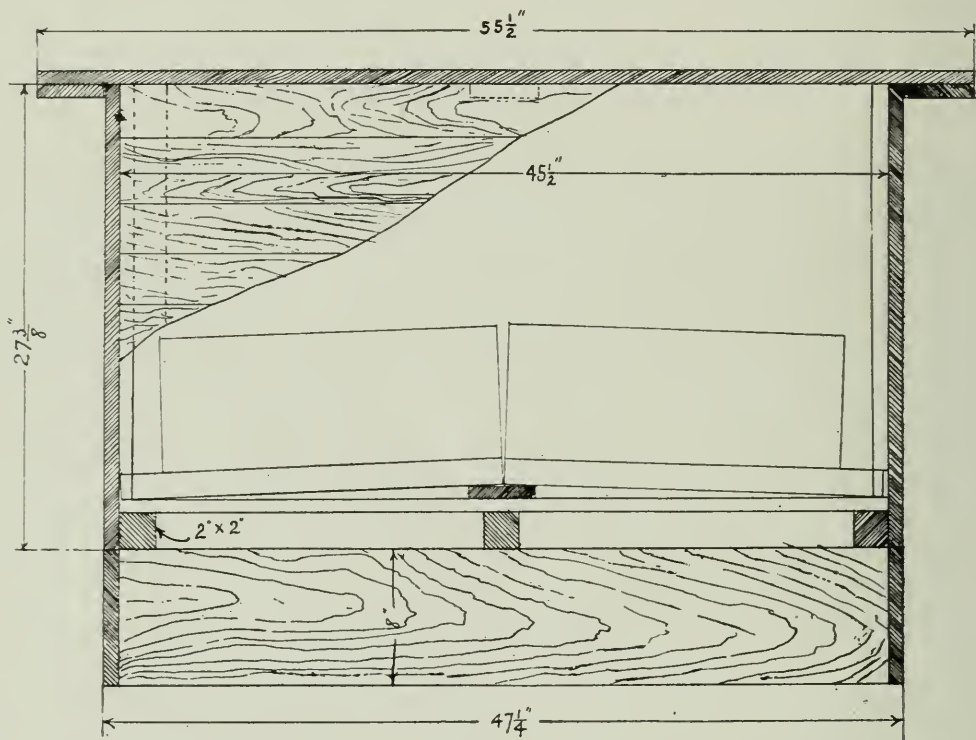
Side elevation of 4-hive Wintering Box, with side cut away to show construction.
